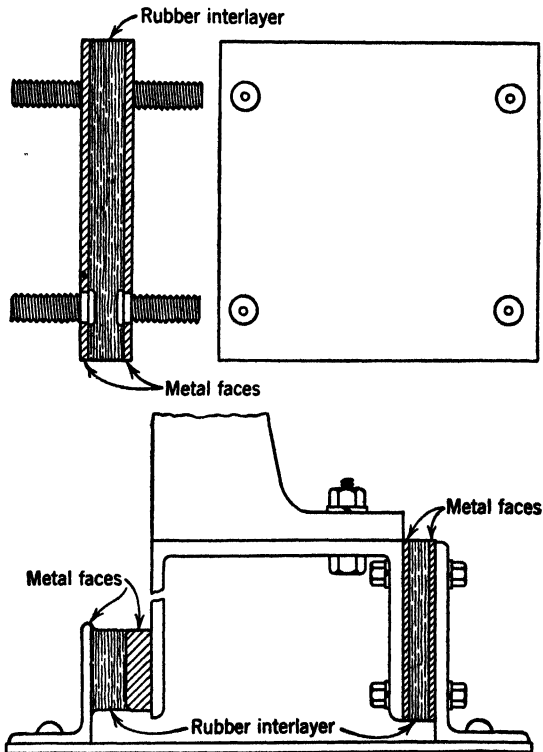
Vibro-Insulators Consisting of Rubber Sandwiched between Flat Steel Surfaces, in Turn Attached to Machine Parts; Rubber Stressed in Shear by Vertical Load.
